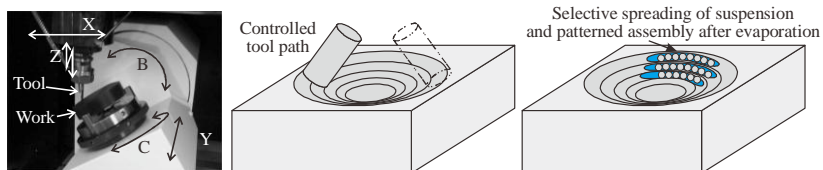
five-axes milling (left), tool path (middle), and patterned assembly (right)
